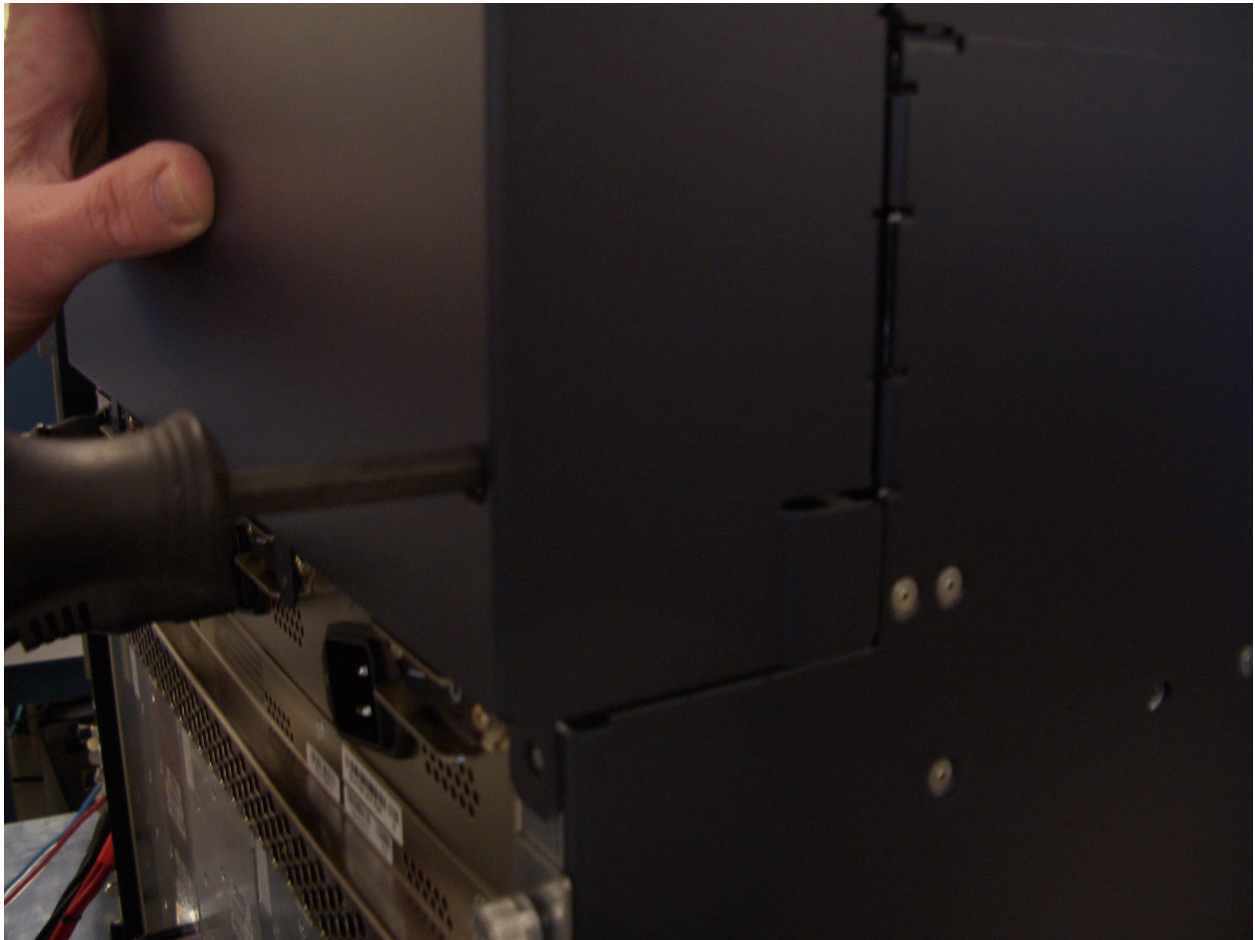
on page 30](#) and [Figure 27 on page 31](#) show the top right and bottom right captive screws being tightened.
